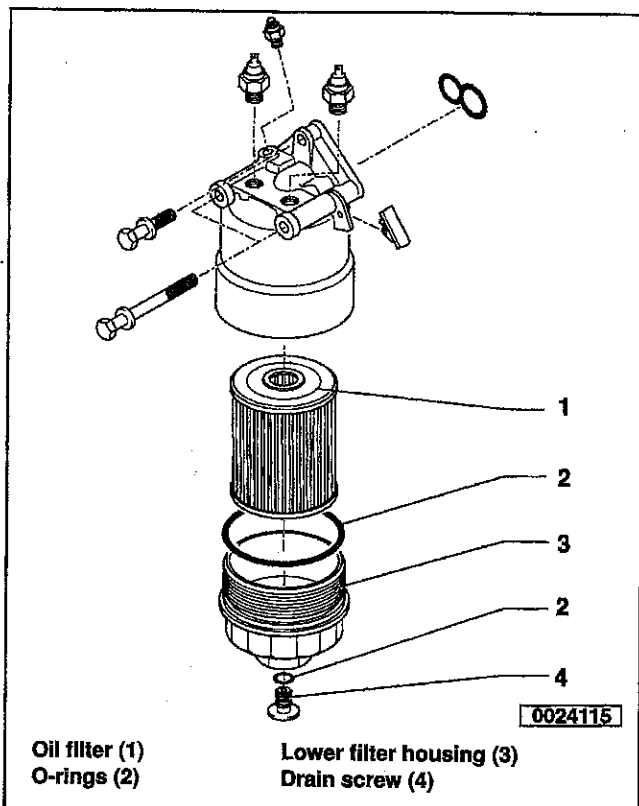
Oil filter assembly used on AAA (VR6) engine.
